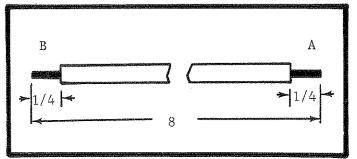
Dimensions for Cable #4 for Voltage Programing. Dimensions are in inches.
